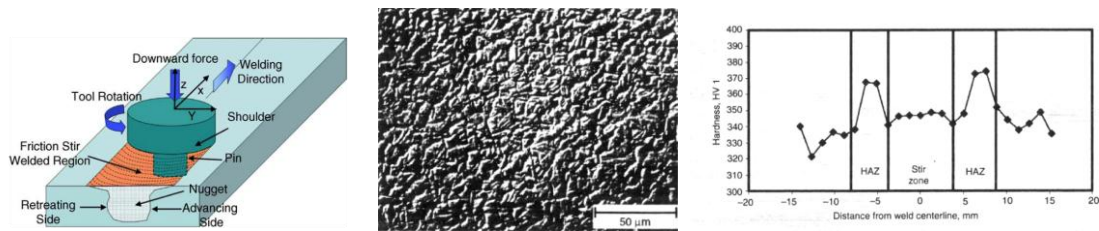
(a) Friction stir weld schematic [Mishra, 2005]. (b) Ti-6Al-4V weld nugget microstructure, near top surface [Leinert, 2000]. (c) Microhardness plot transverse to weld [Leinert, 2000].
